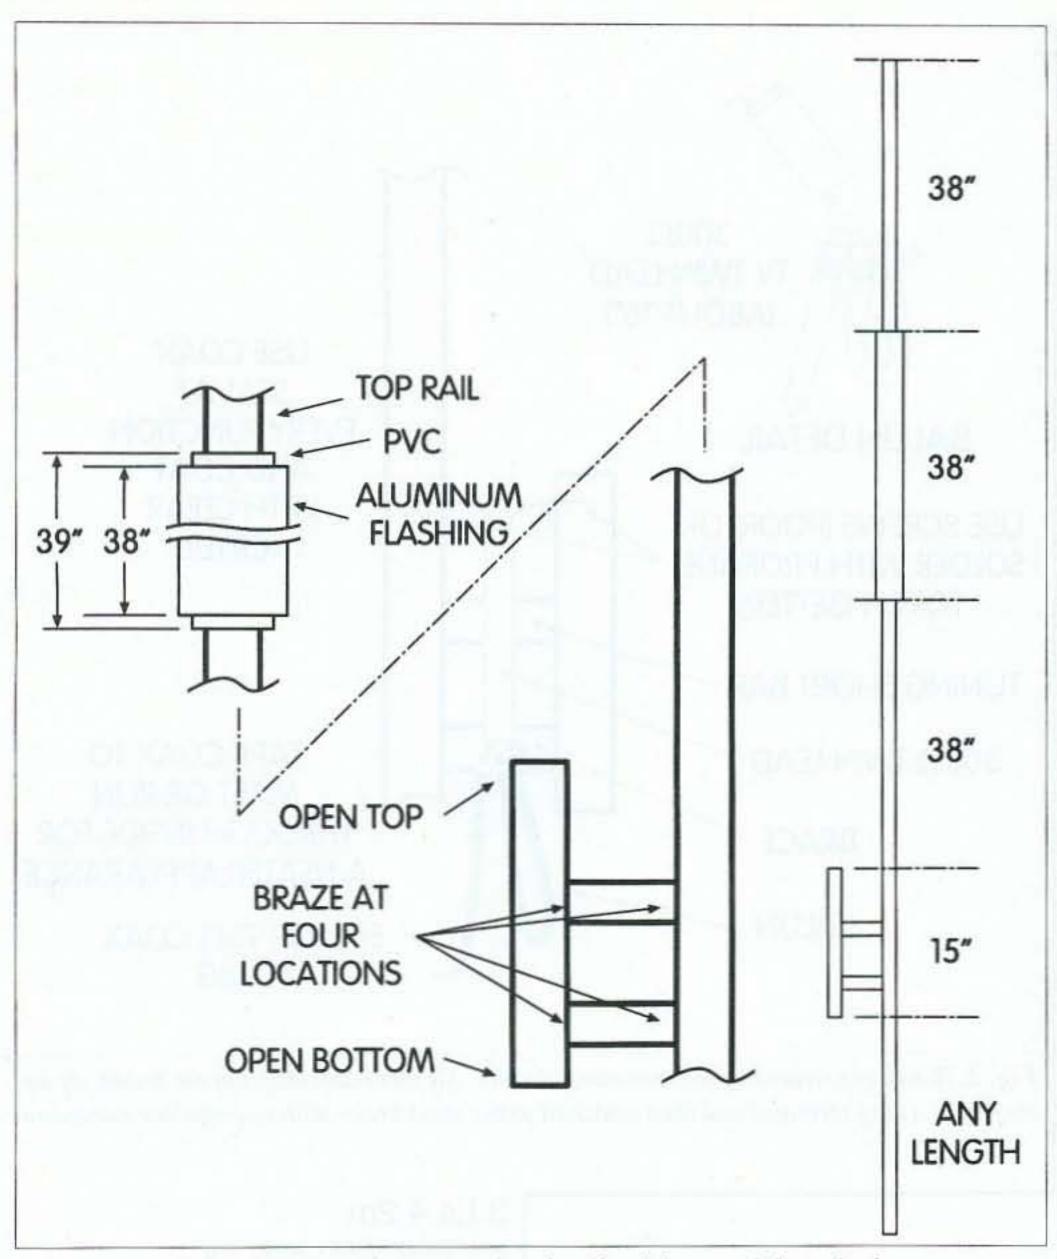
Overall dimensions and construction details of the coaxial vertical.
